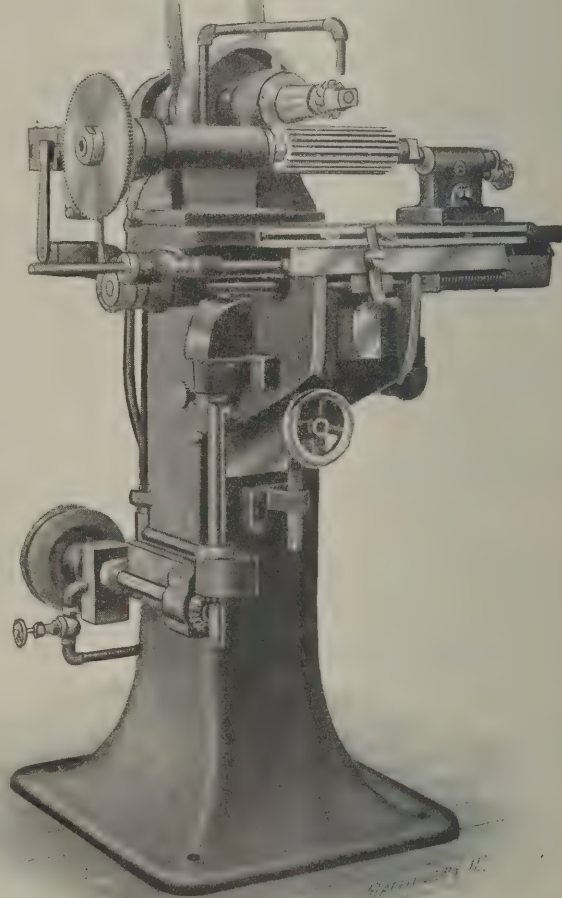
Sloan & Chace Automatic Gear Cutter.
